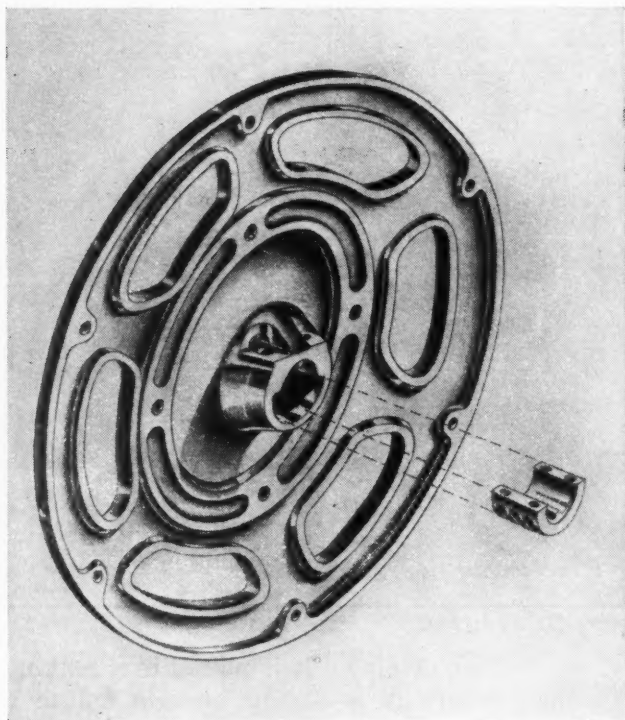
Wheel Hub and Clamp, which are Broached Semi-automatically on a Colonial Horizontal Broaching Machine Equipped with Special Broach-handling and Work-clamping Devices
